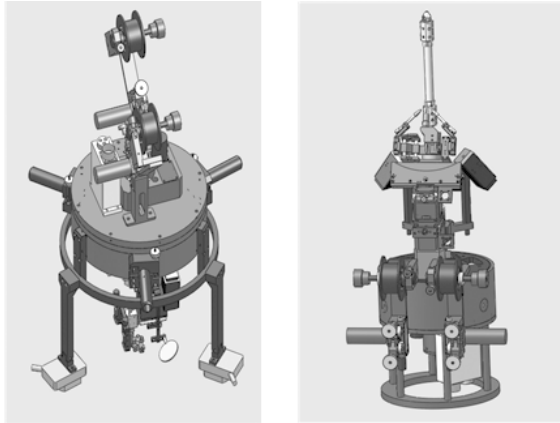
Welding procedures of Half Nozzle Repair
